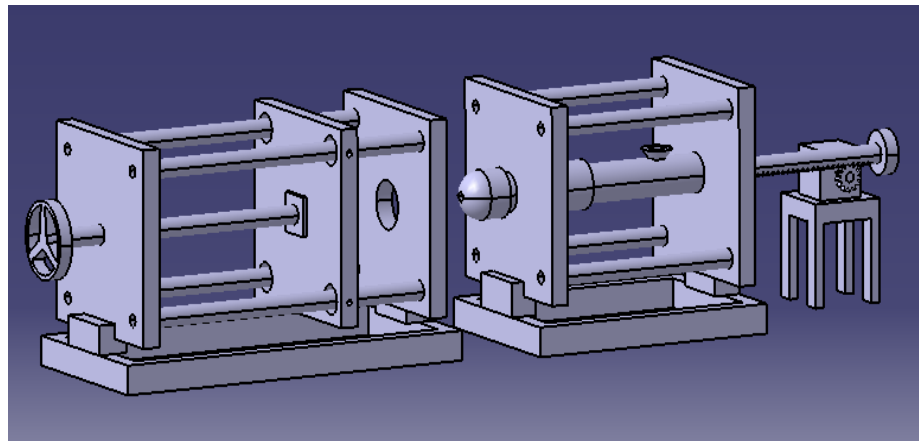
Design 2 Mini Micro Injection Moulding Machine
